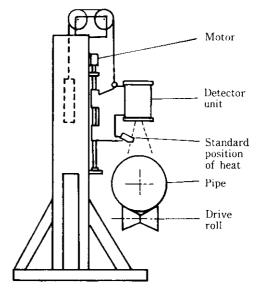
Absolute seam position detecting system installed in 26" ERW mill
